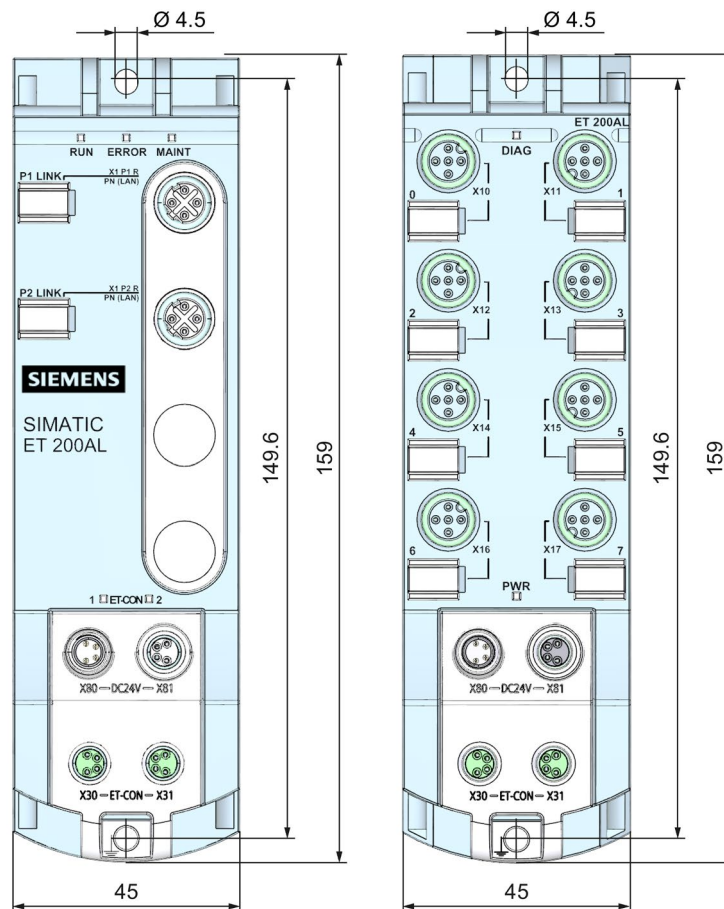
Dimensions for mounting interface modules and 45 mm I/O modules
